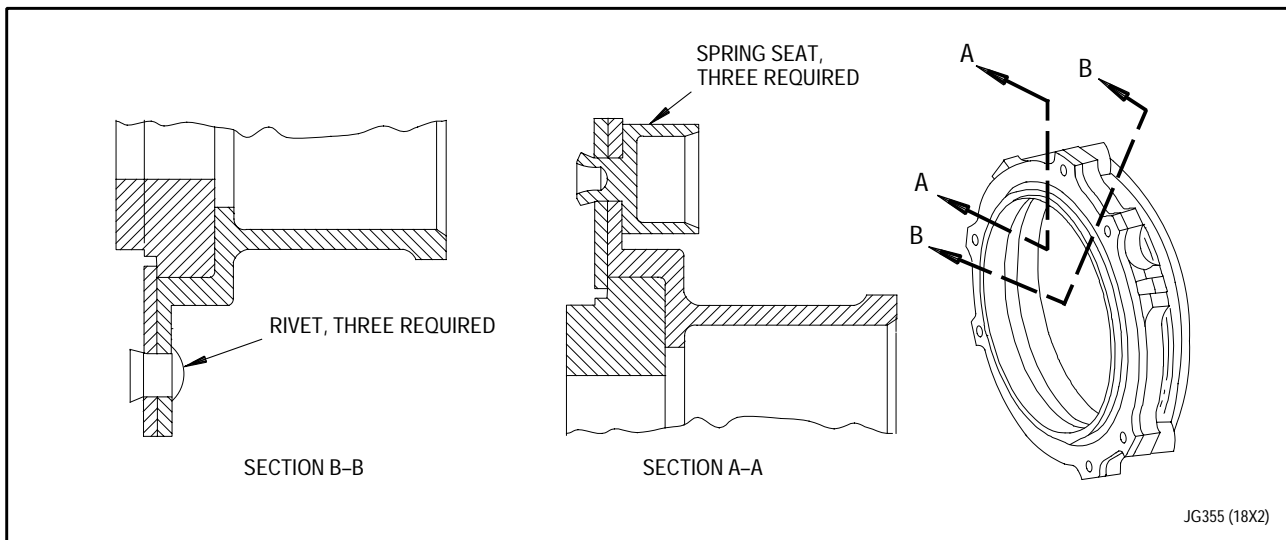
No. 3 Bearing Rear Face Seal Assembly - Spring Seat or Rivet Replacement
